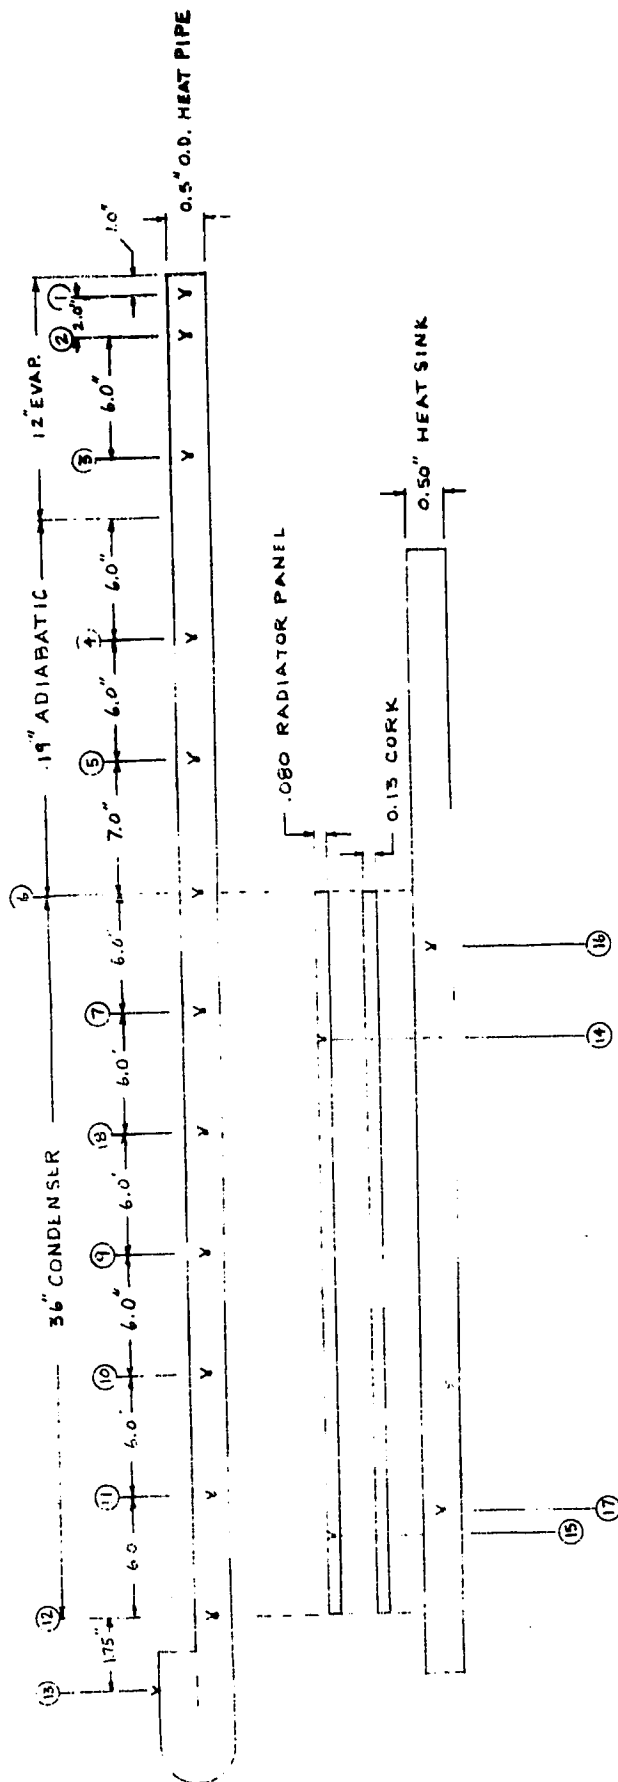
Engineering Sketch of SN009 Heat Pipe Test Assembly
